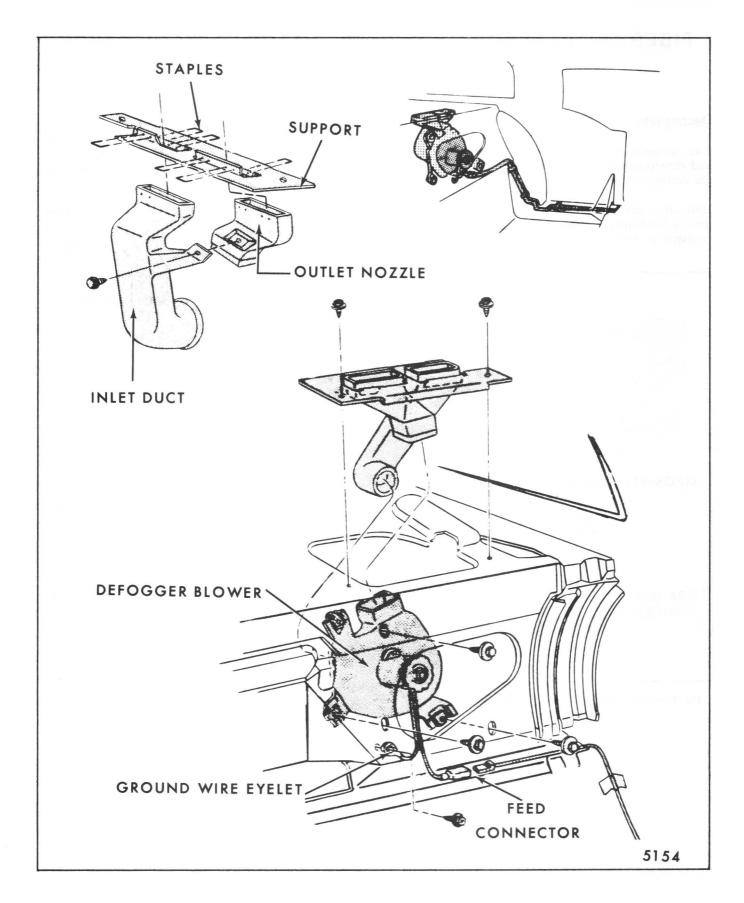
Defogger Blower Installation - Buick "E-87" Style
